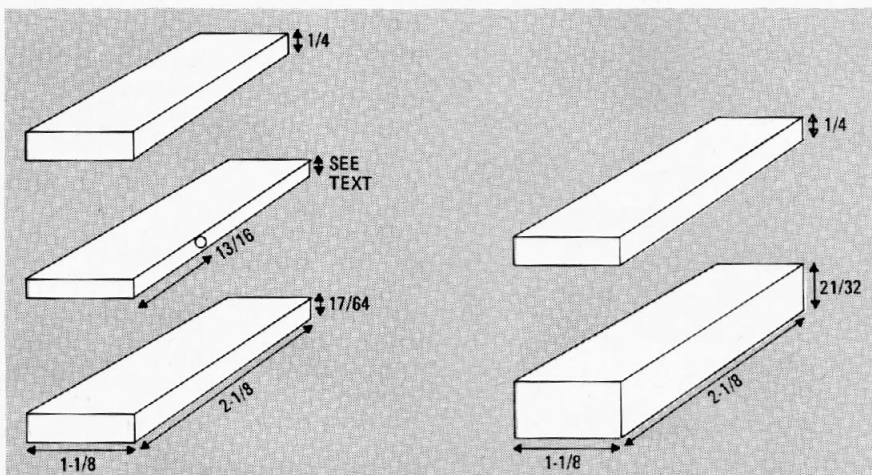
MOTOR-MOUNTING BLOCK DIMENSIONS. The dimensions shown are for the author's system. You may have to change the dimensions to fit your motors.
